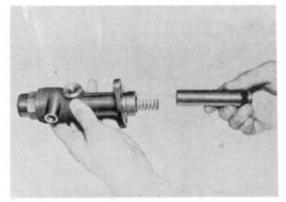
22 Taking out Master Cylinder Piston 7. Remove master cylinder cap.
